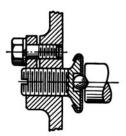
Combination pivot joint and end-thrust bearing, the ball being retained by the washer spun over the fixed screw.
